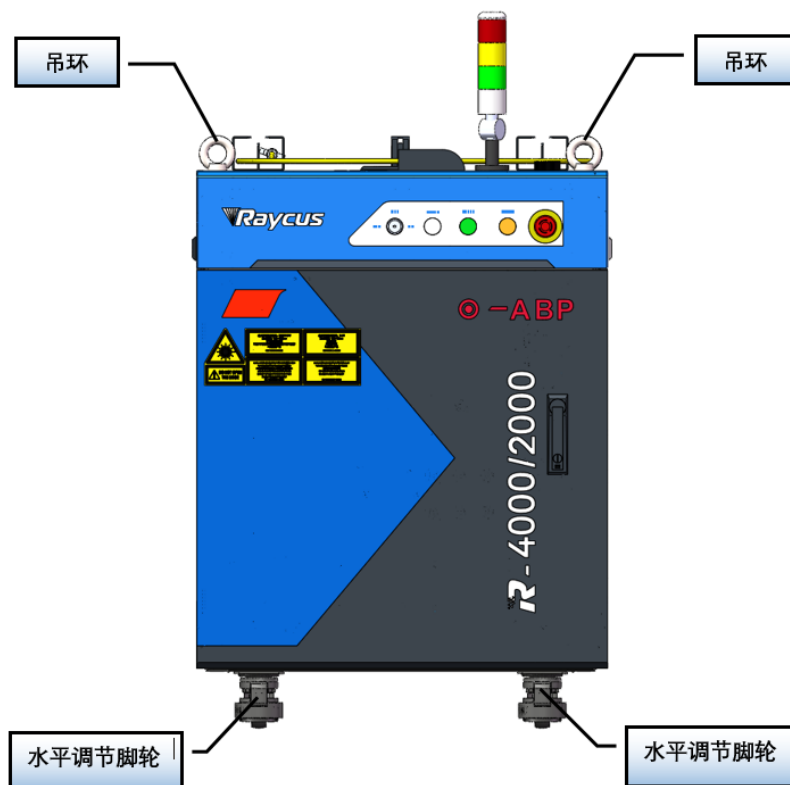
Laser top lifting ring and bottom level adjustment caster.
